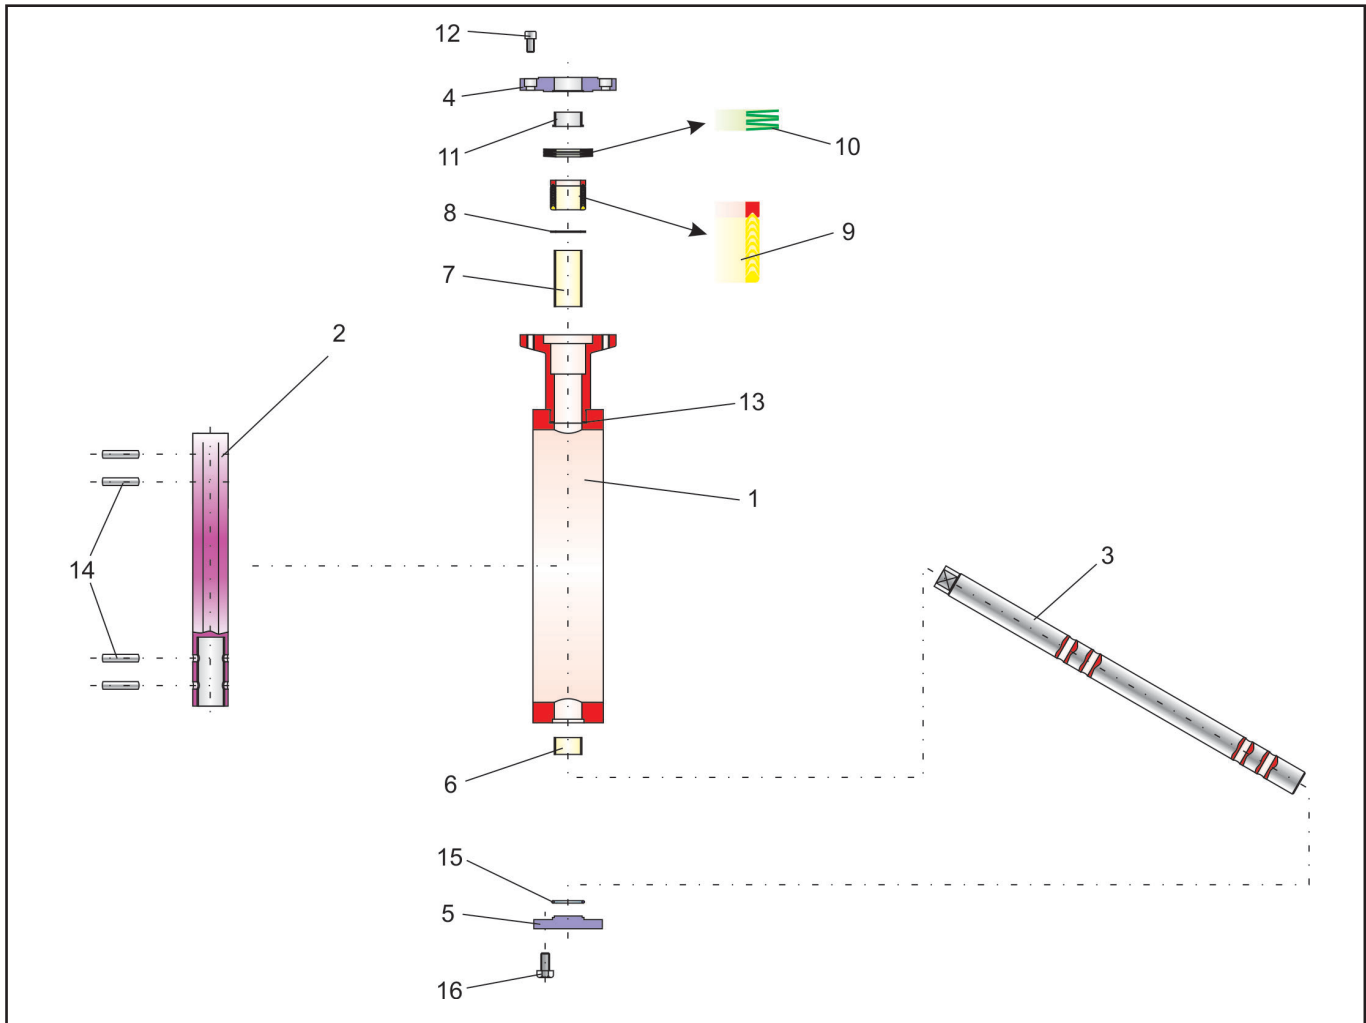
Detail drawing of the butterfly valve Series 14e
